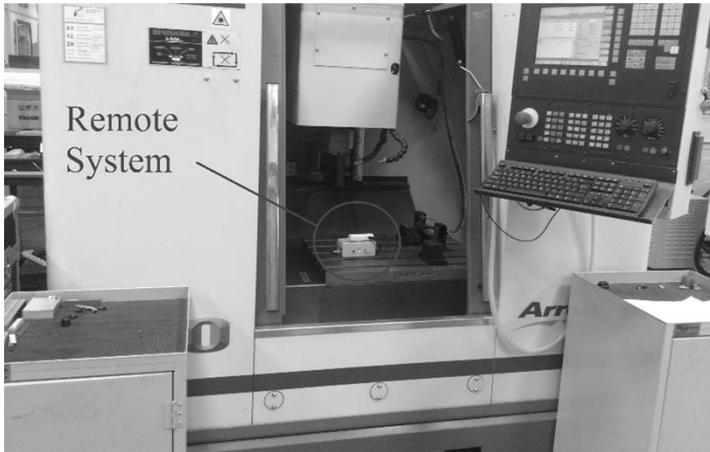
A Picture of the Remote System on the Work Table of one CNC machine.
